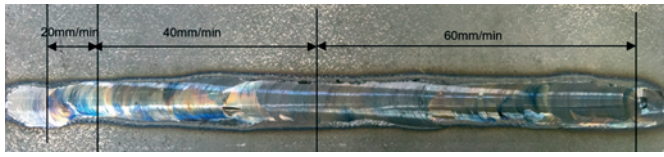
Appearance of the FSW-IG welded joint of DD13 steel
